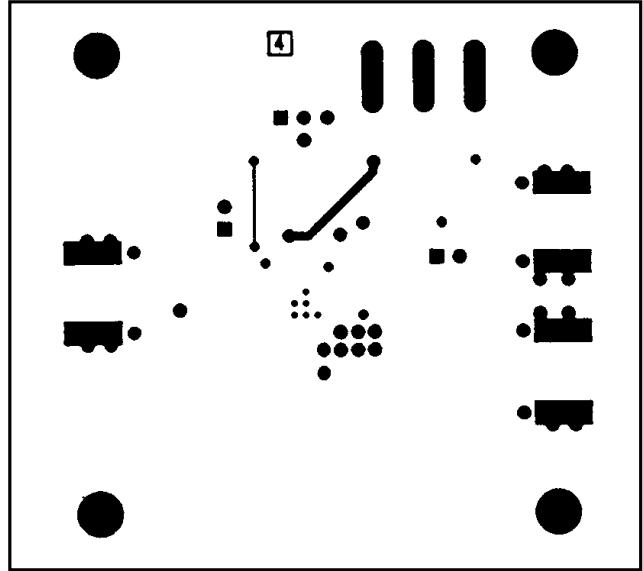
MAX3760 EV Kit PC Board Layout—Solder Side
